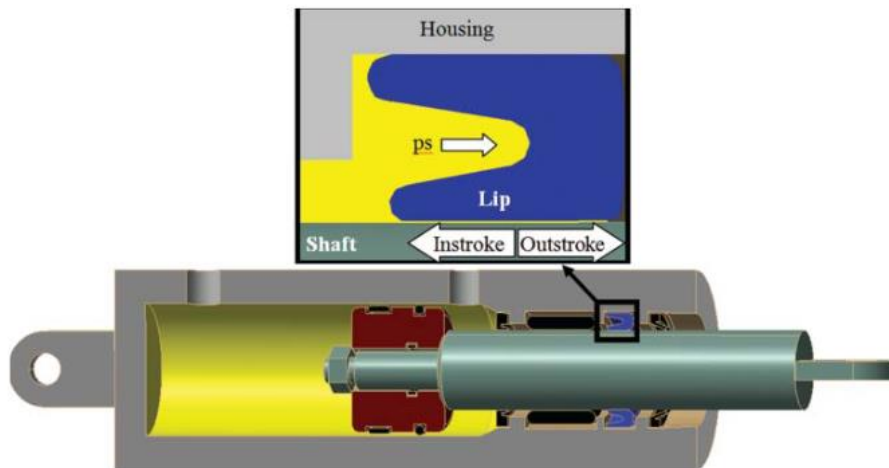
Hydraulic cylinder with U-type rod seal [19]
